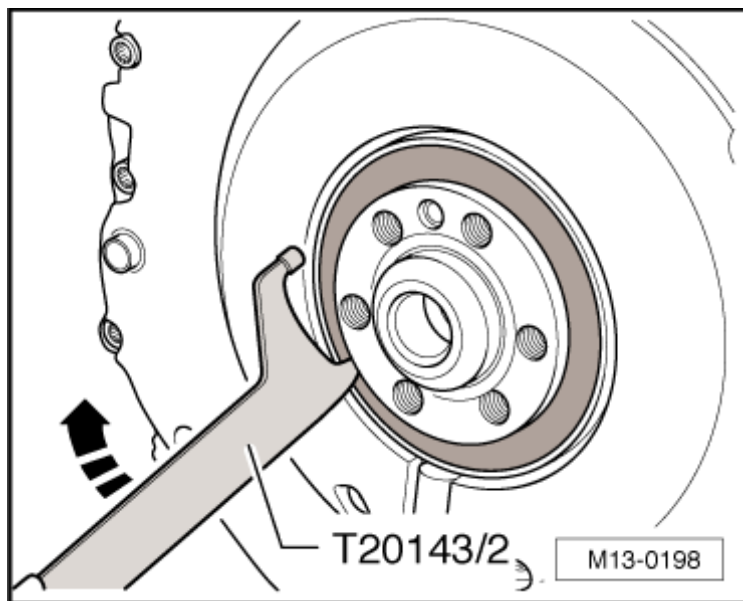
Pulling Out Sealing Ring Using Pulling Hook T20143/2
